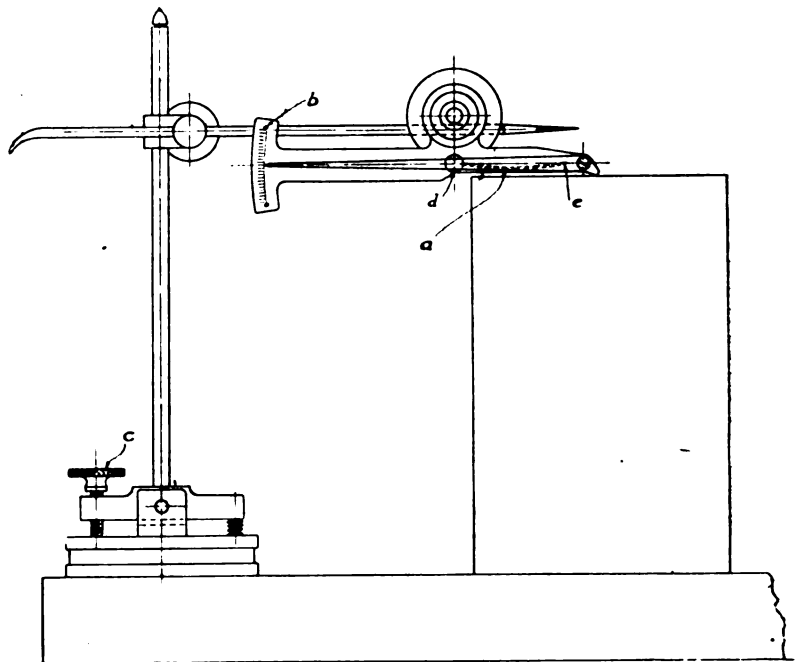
METHOD OF USING THE SURFACE INDICATOR.
